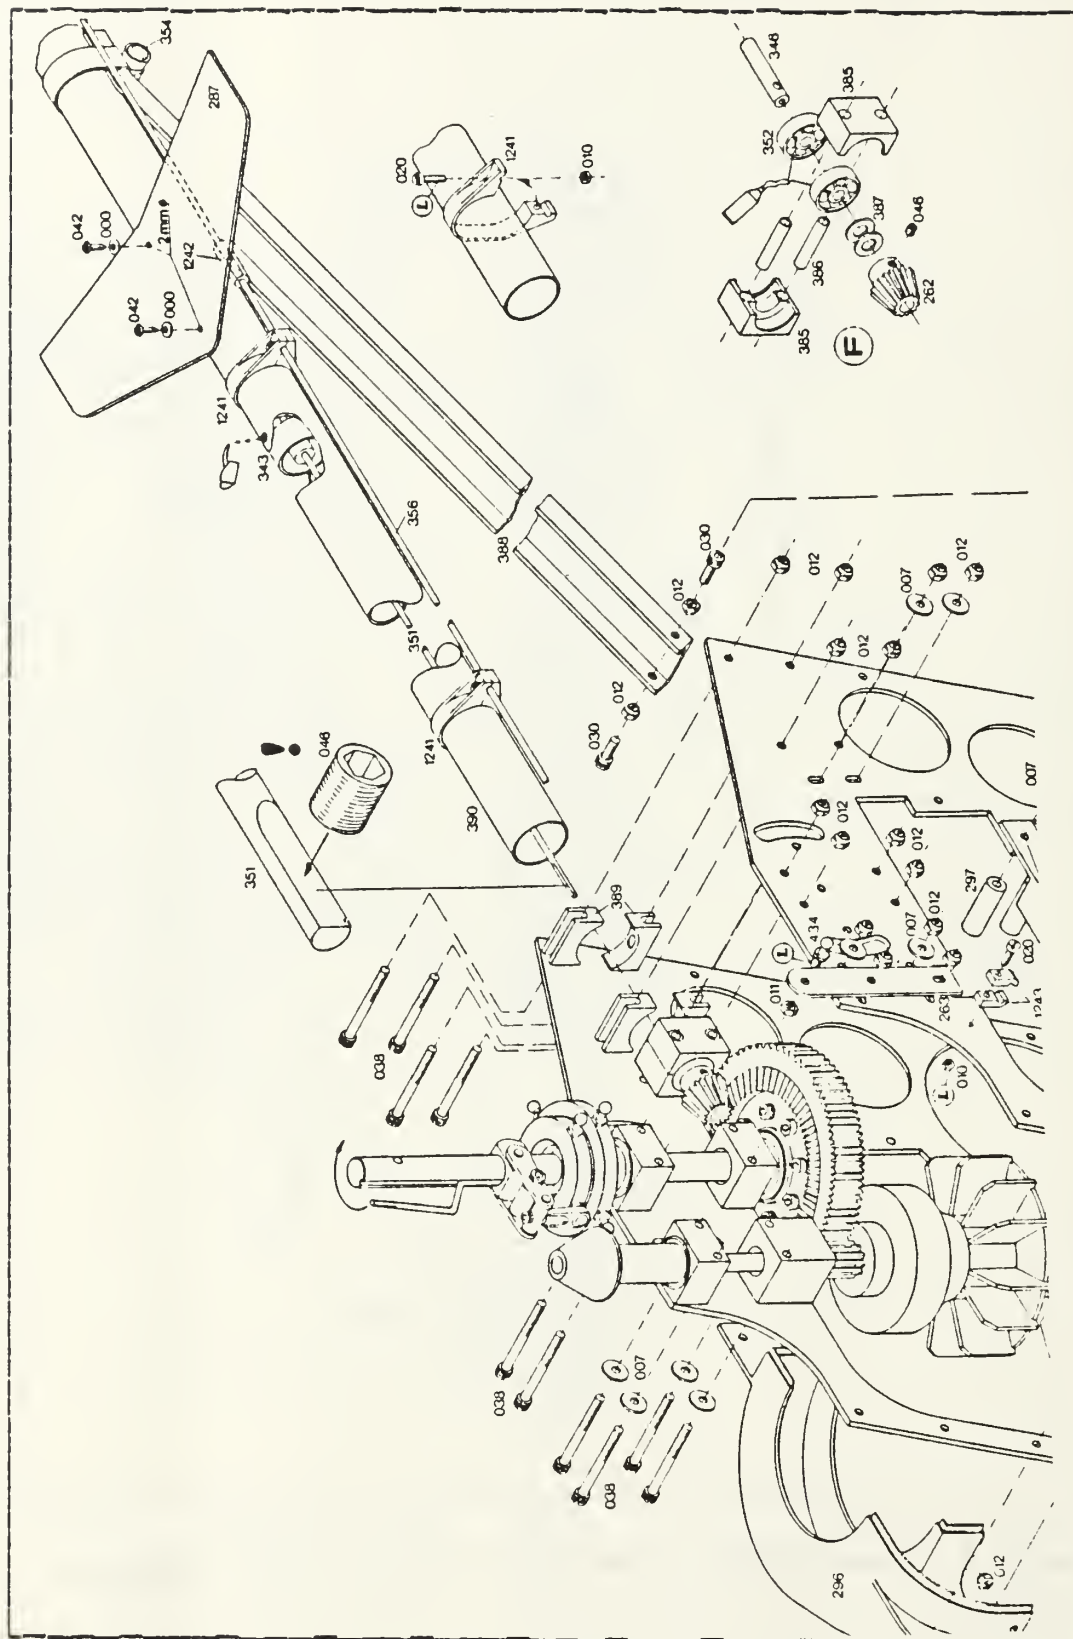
Main Rotor & Tail Rotor Drive Assembly
